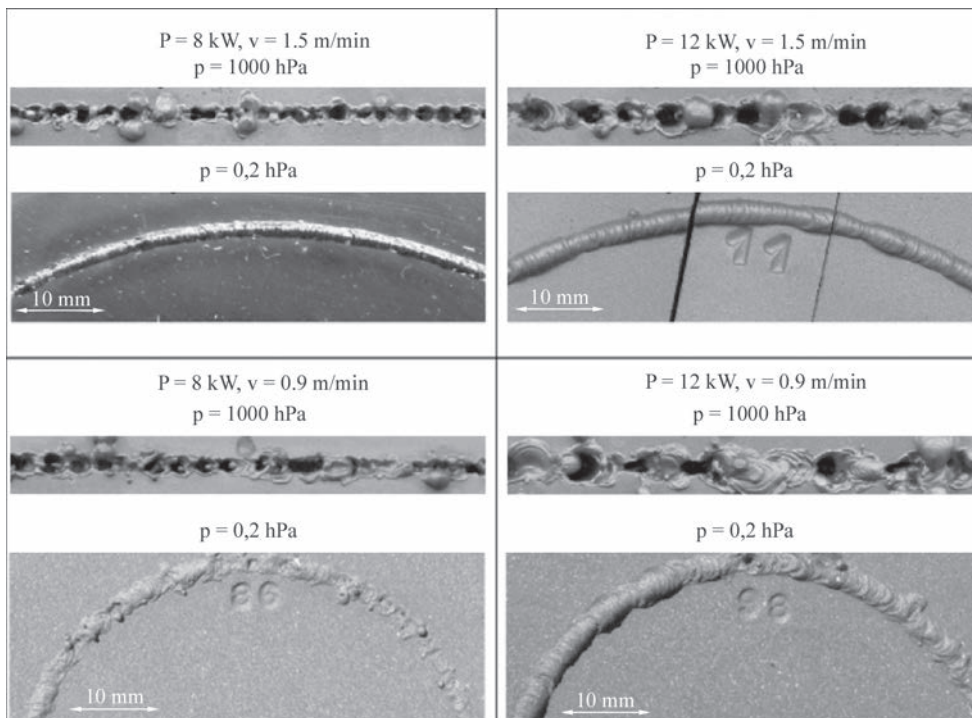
LaVa-welding of copper — weld metal ejections at ambient pressure and at 0.2 hPa
